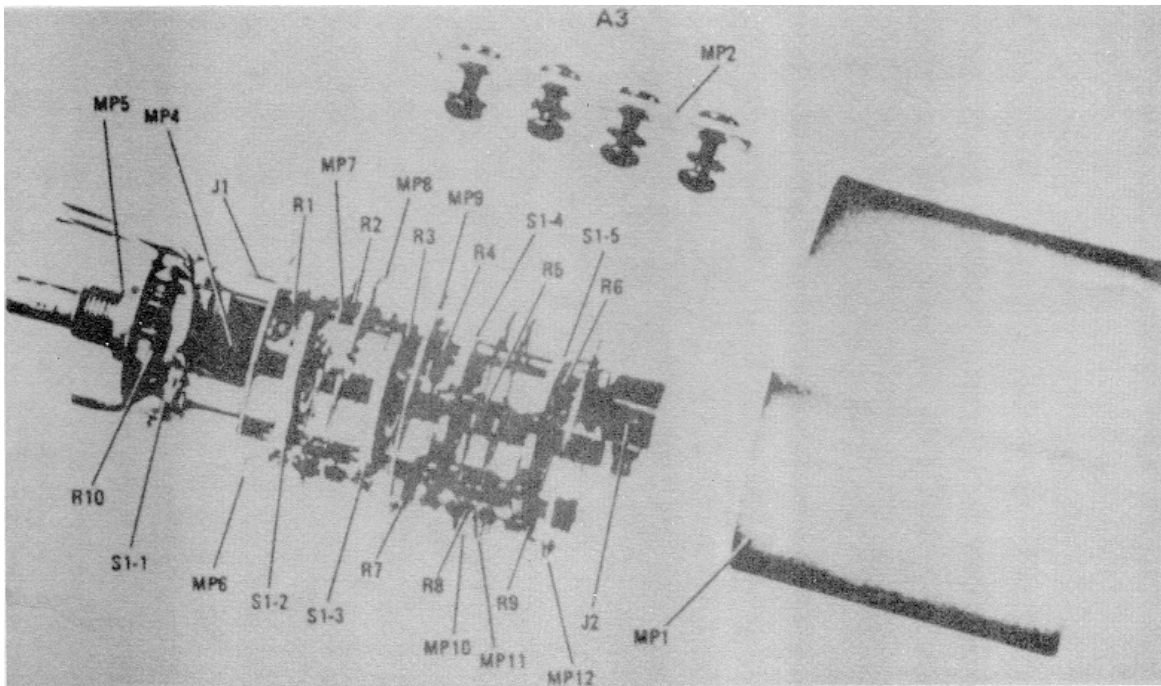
Input Attenuator Assembly A3 (08553-6021) Replaceable Parts Locations (ERRATA)
